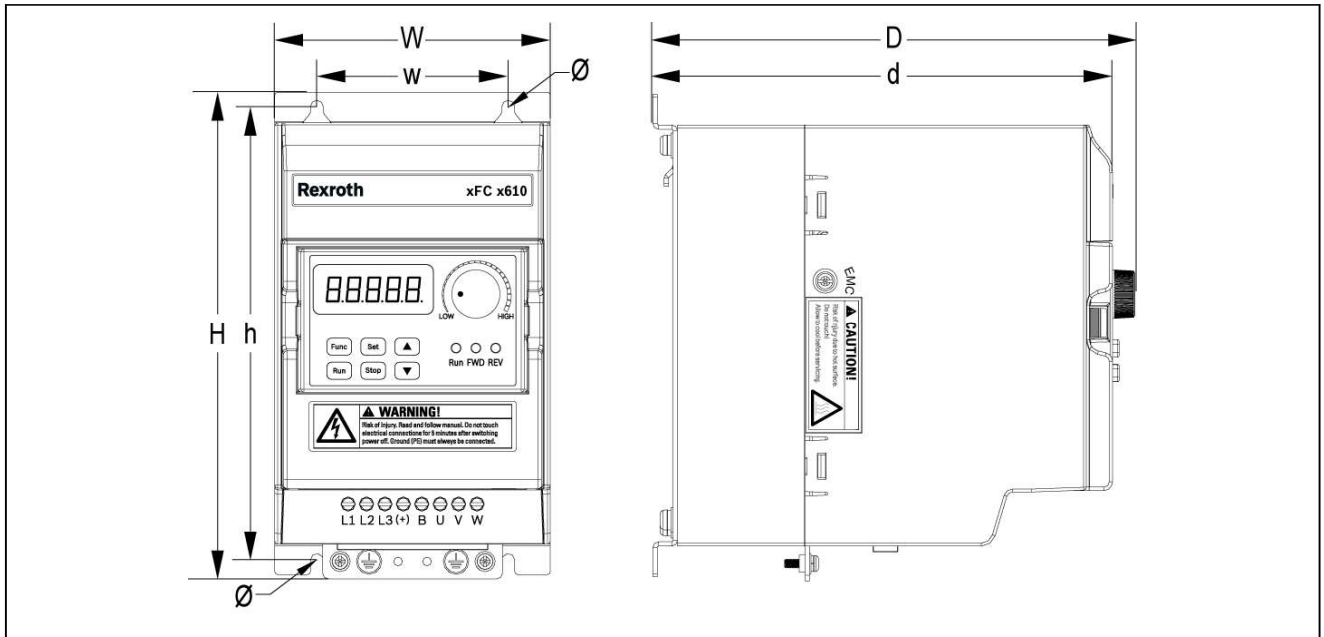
VFC x610 0K40...4K00 dimensions figure
